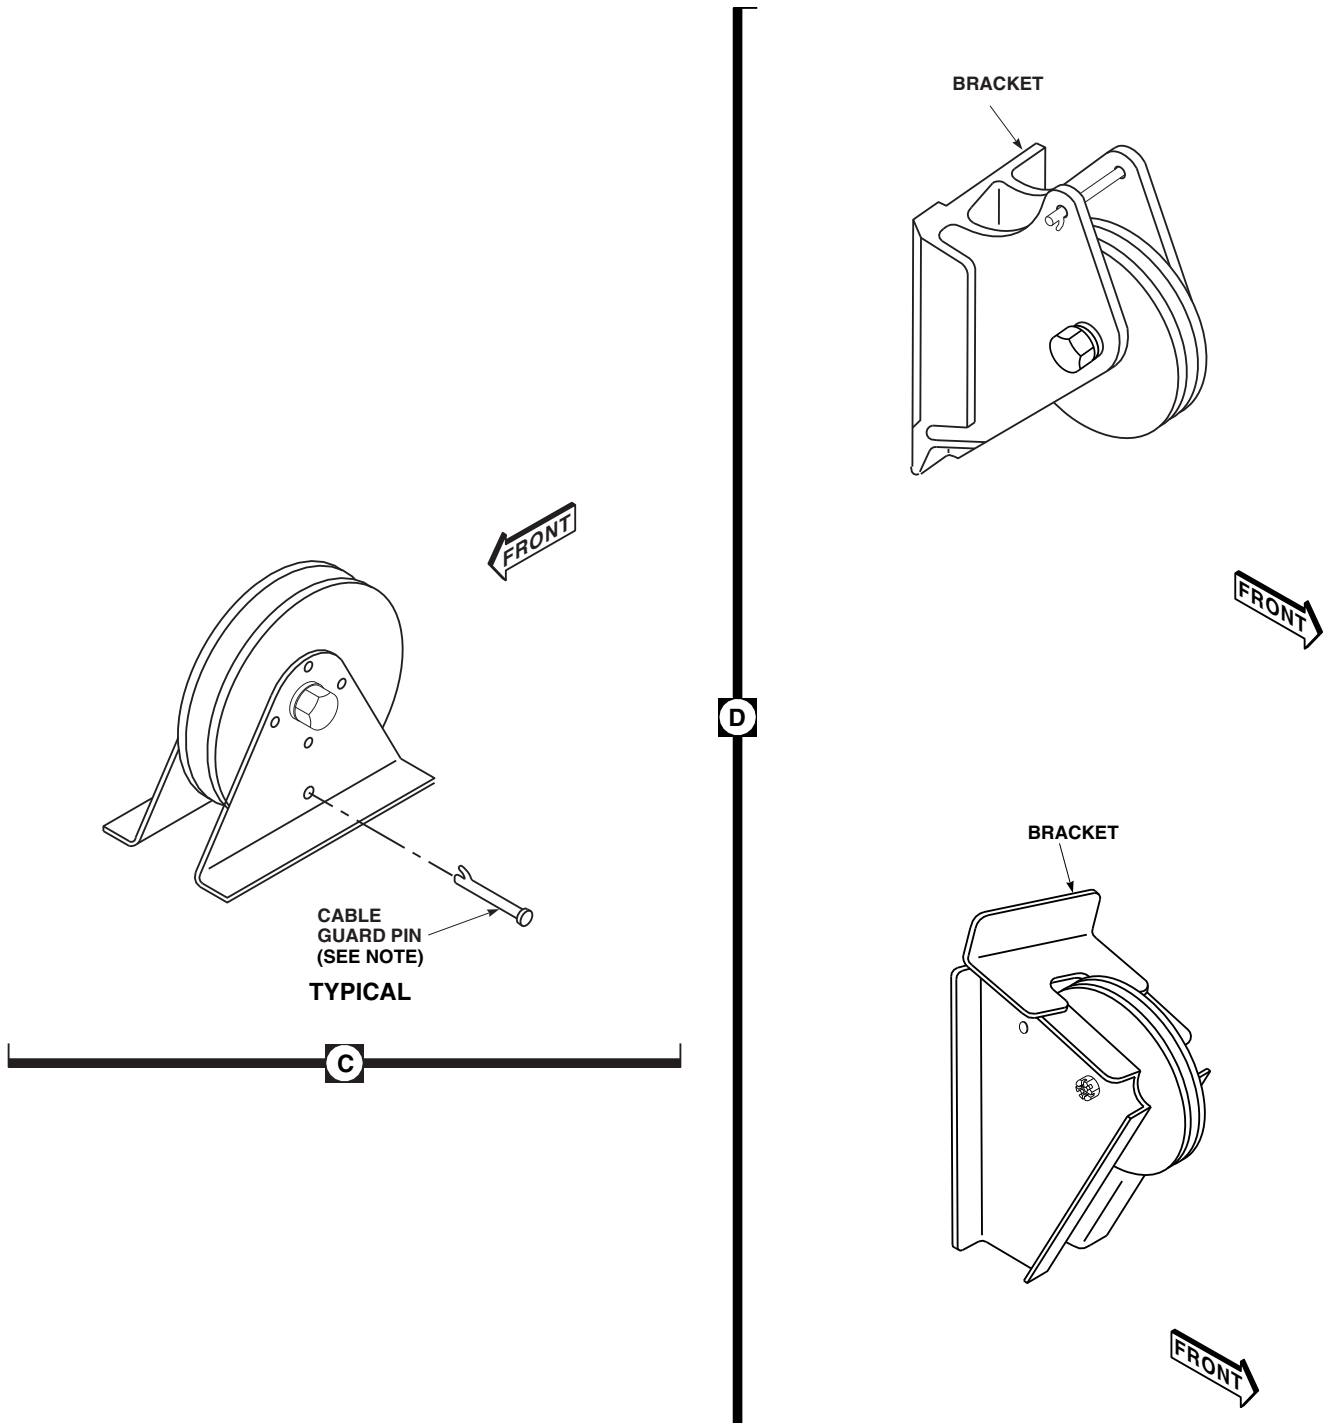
INSPECT FLIGHT CONTROL CABLES (SHEET 2 OF 3)
